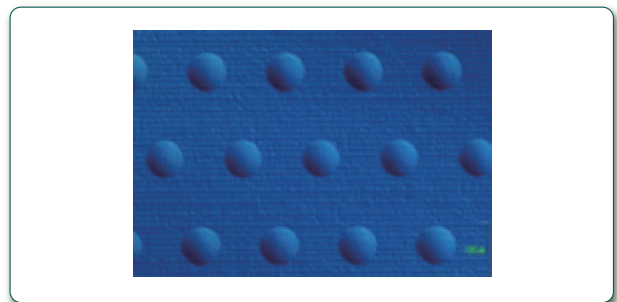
Nano dimple patterns machined on flat surface made of hardened steel
